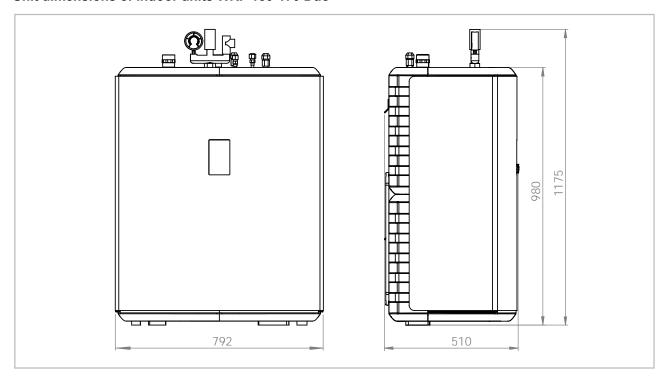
Dimensions indoor unit series WKF 130-170 Duo (all dimensions in mm)
